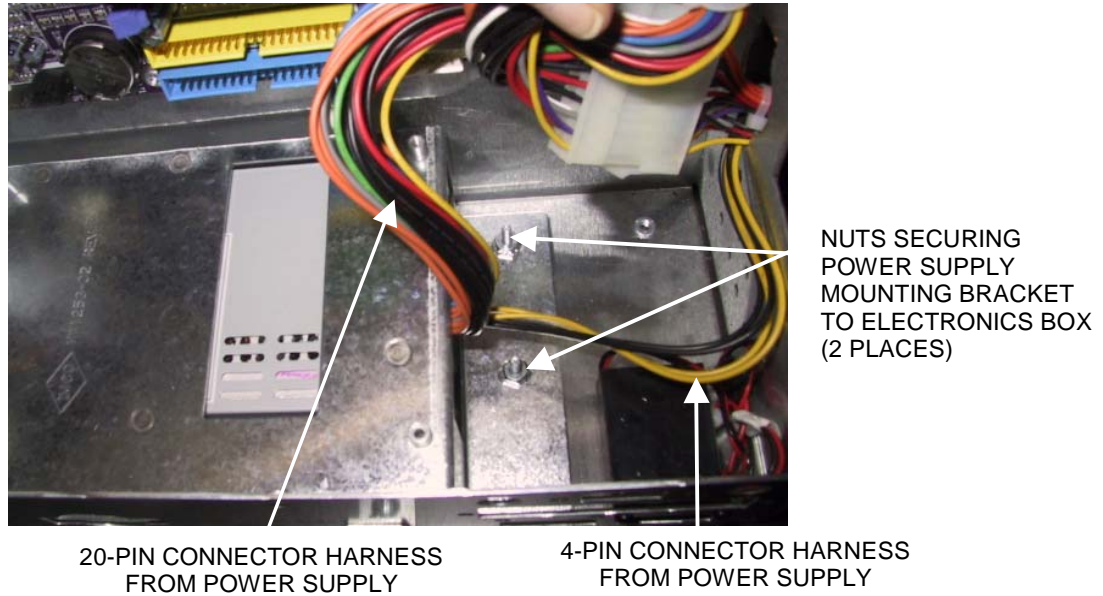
POWER SUPPLY MOUNTING BRACKET INSIDE ELECTRONICS BOX
